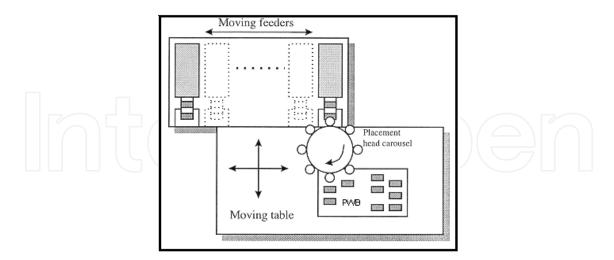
Principle of a rotary turret placement machine (Johnsson, 1999).
